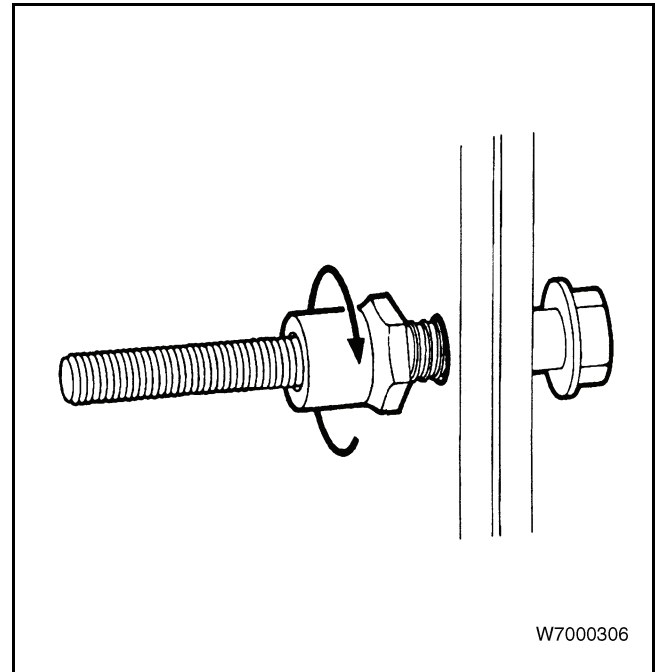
Threading Collar onto Pin (HUCK-FIT® Fastener Shown)
